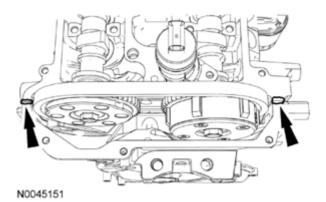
Locating Silicone Gasket And Sealant Applying Locations Of Valve Covers Courtesy of FORD MOTOR CO.
